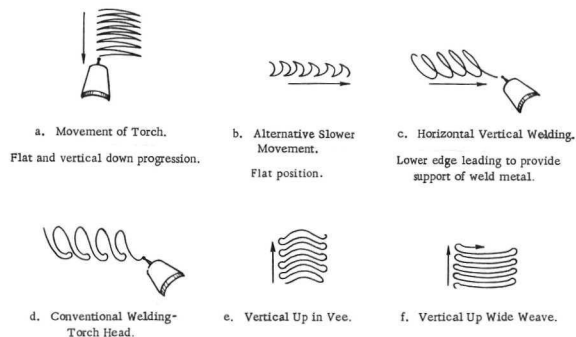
Welding-torch manipulating techniques.
